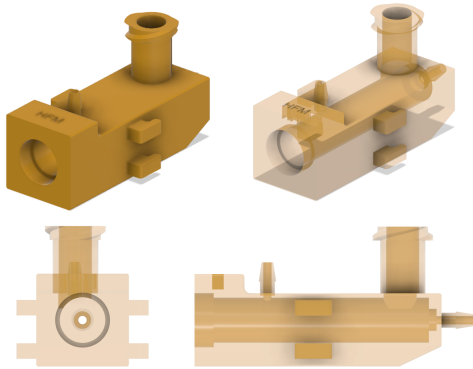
HFM chip holder. The holder contains an opening that is tailored to precisely fit the HFM chip insert and HFM chip cap.
